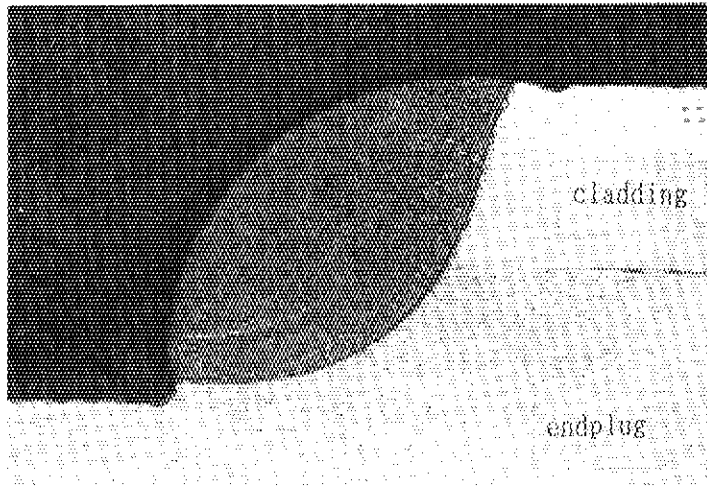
Cross section of welded part of cladding tube and welding conditions
